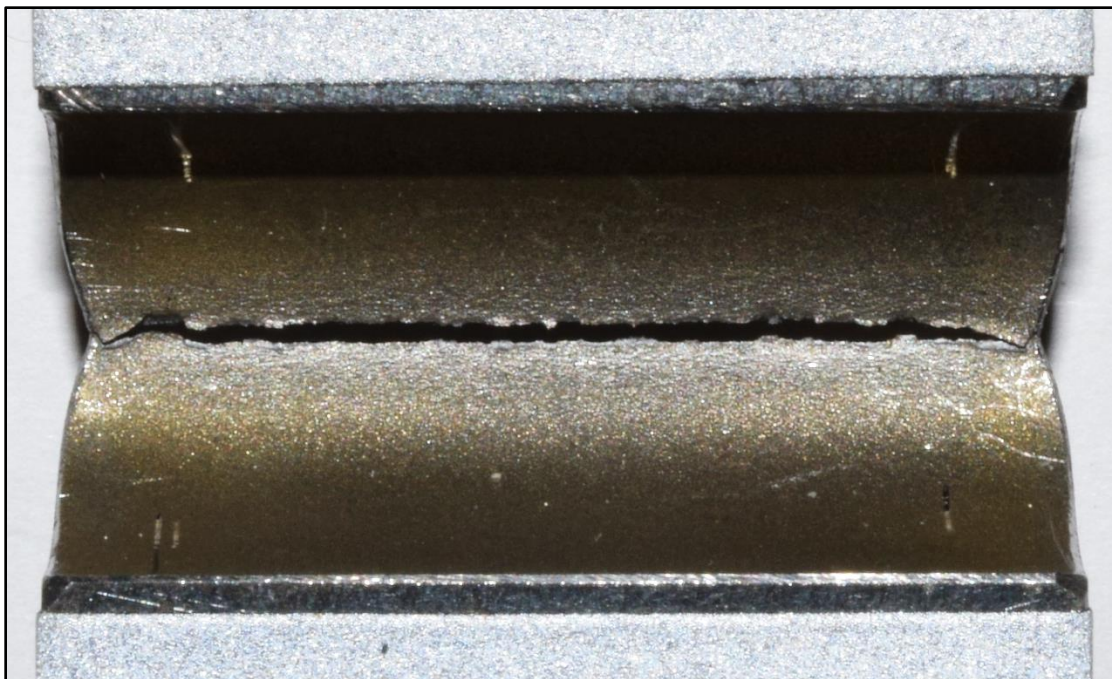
Thick Small Notched Specimen: Macro View of Typical Complete Failure
